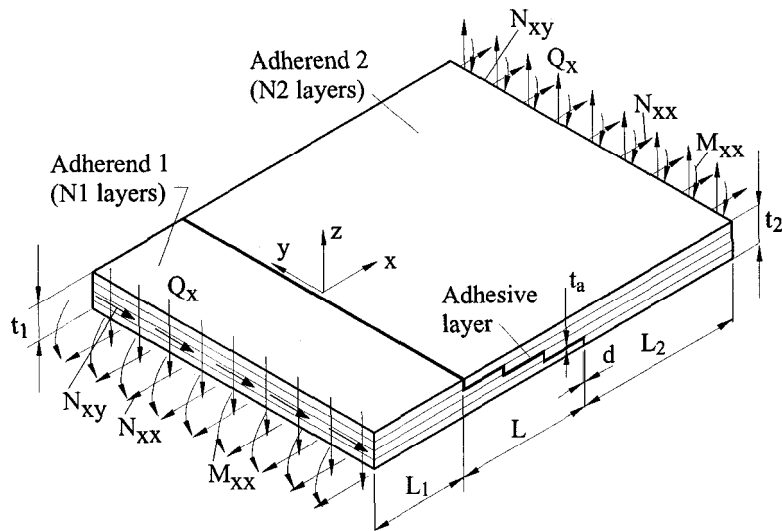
Schematic illustration of adhesive single sided stepped lap joint subjected to general loading conditions.
